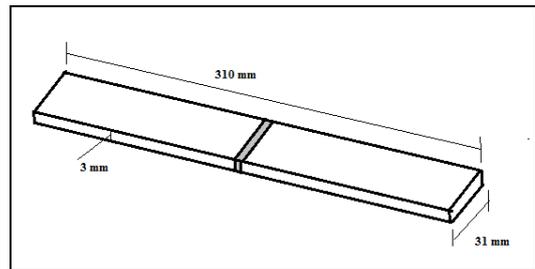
Specimens, with dimensions of 310 mm x 31mm x 3mm of each was used as the work pieces.
